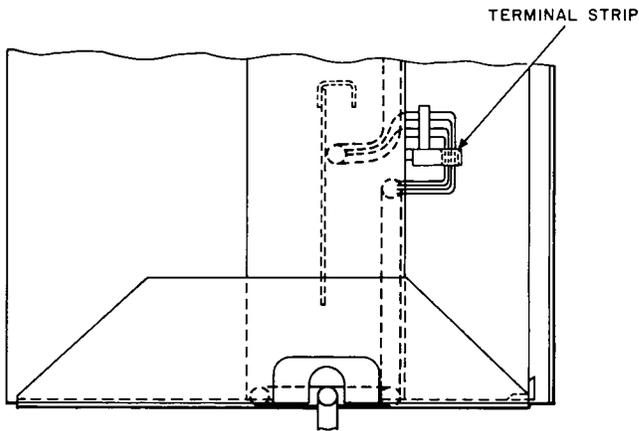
Arrangement for Terminating Switchboard Cable When Cross-Connecting Terminal is Provided—Side View
